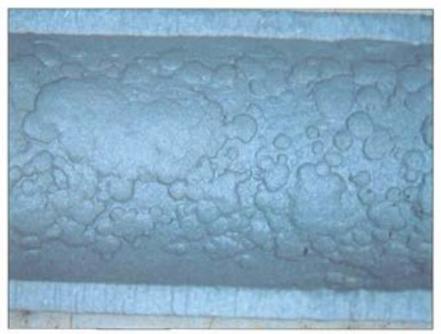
Corrosion damage on row 14 - tube 2 (top) after aluminum oxide blasting.
